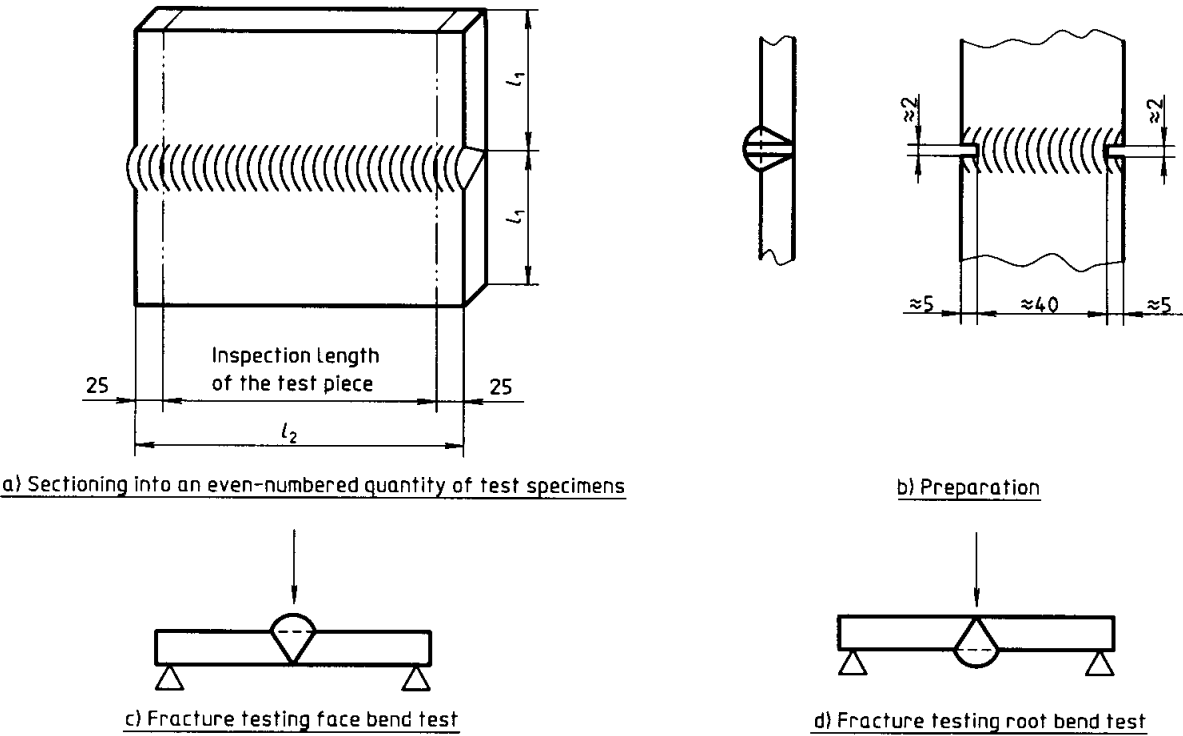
Preparation and fracture testing of test specimens for a butt weld in plate
